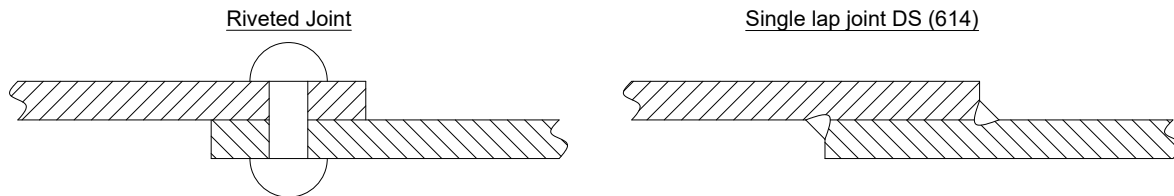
Proposed welded lap joint and riveted lap joint
